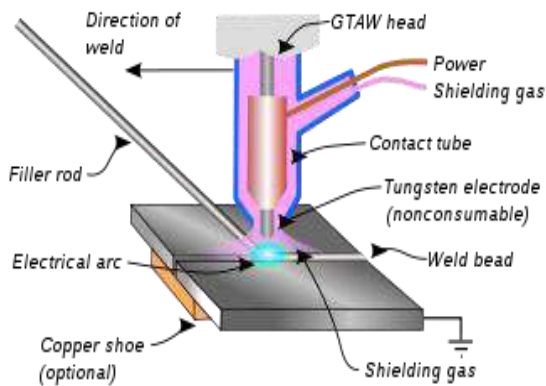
Tungsten Inert Gas Welding Process[8].
